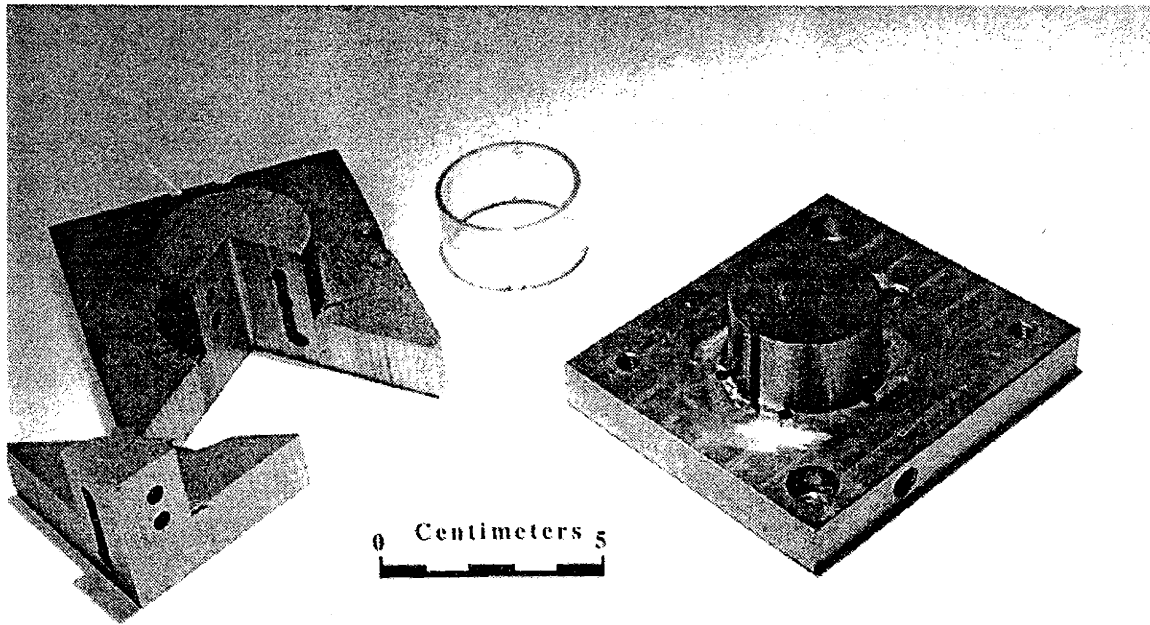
Infiltrated and machined 3D Printed core insert (right) and an infiltrated core insert that has been cut open to reveal the conformal cooling channels. (left)
